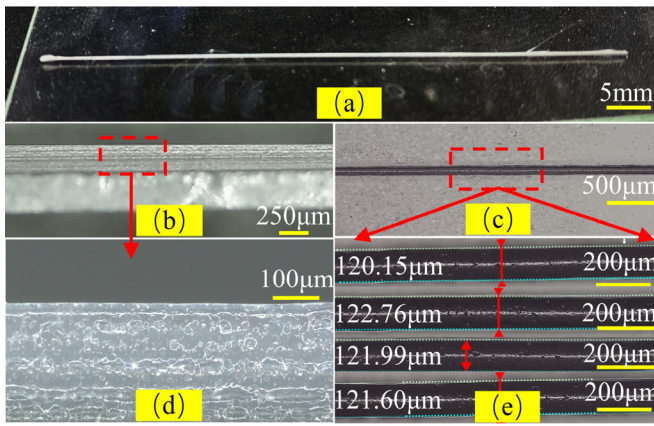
Structural morphology of micro ‘wall’ with a large aspect ratio: (a) overall macro image, (b) Front views, (c) Top views, (d) Enlarged view of the front side, and (e) Enlarged view of the top
